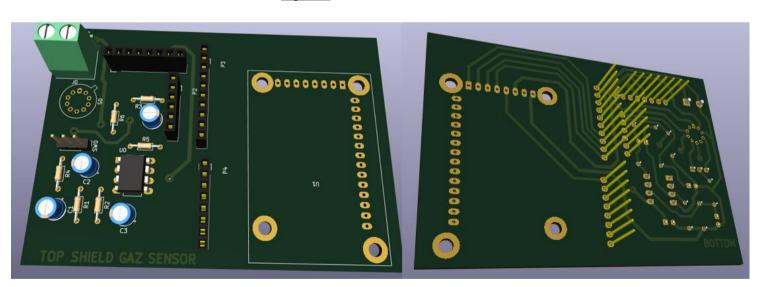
KiCad - Other view of our Shield Gaz Sensor
